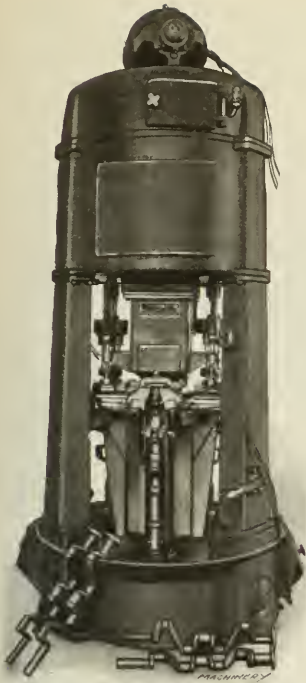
Baush Station Type Machine for drilling and reaming six holes in Crankshaft Flange
